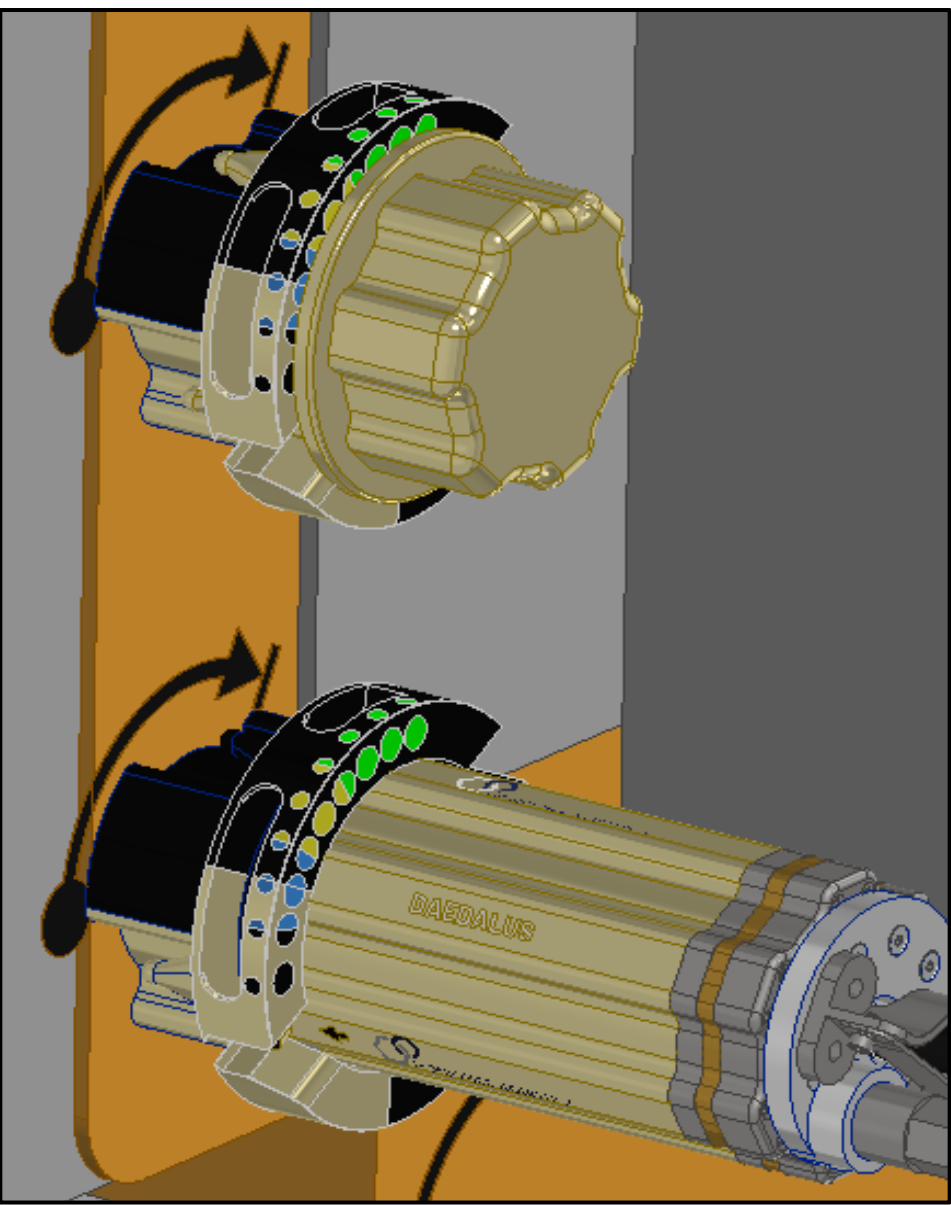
Socket Projectile Shield (top), Link Installed in Socket (Bottom)
